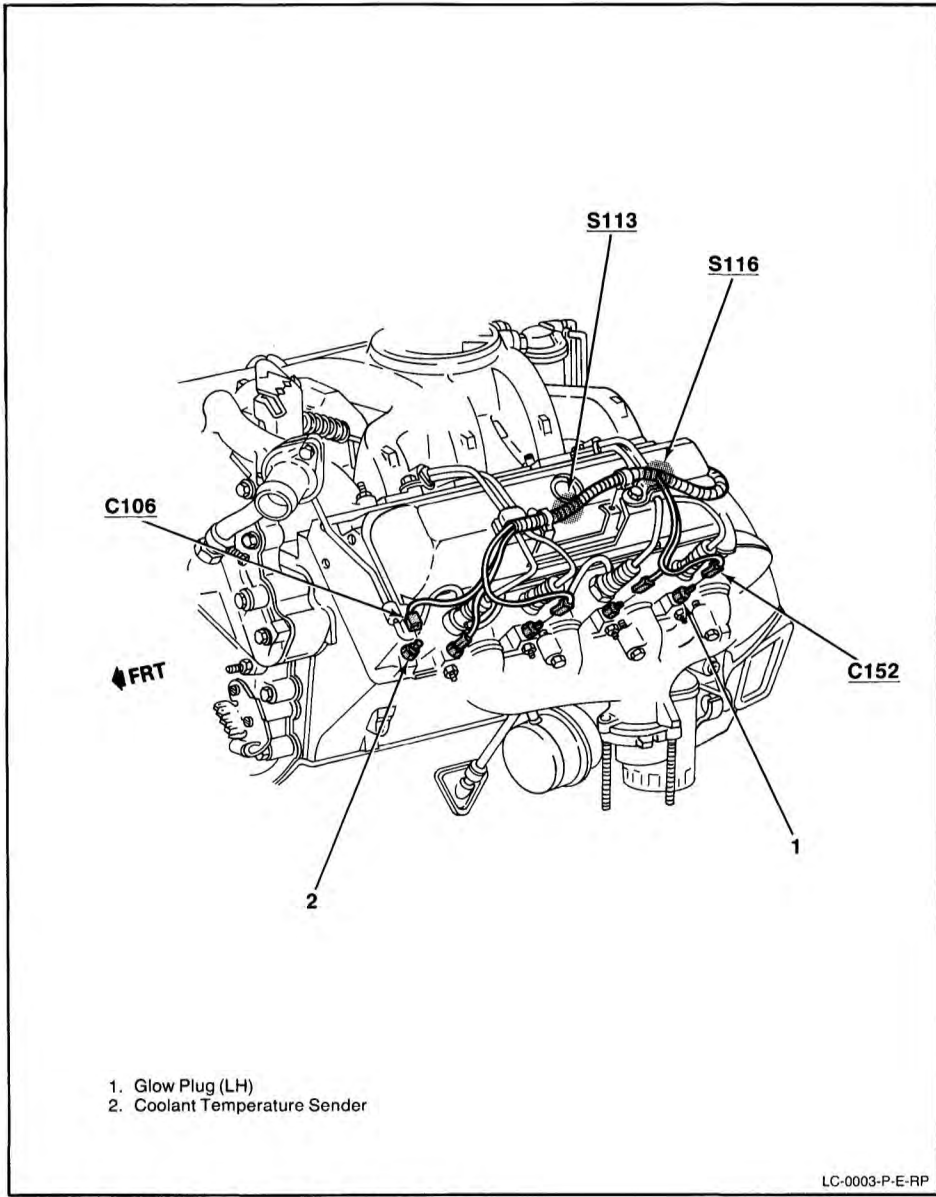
Engine Wiring Harness — Left Side (RPO LL4)
